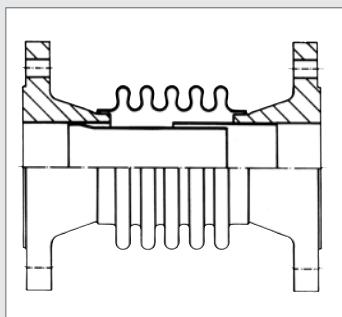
Axial expansion joint with welding neck flanges
